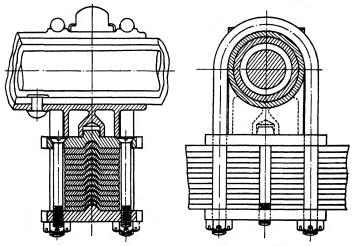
REAR-AXLE TO SPRING FIXTURE
